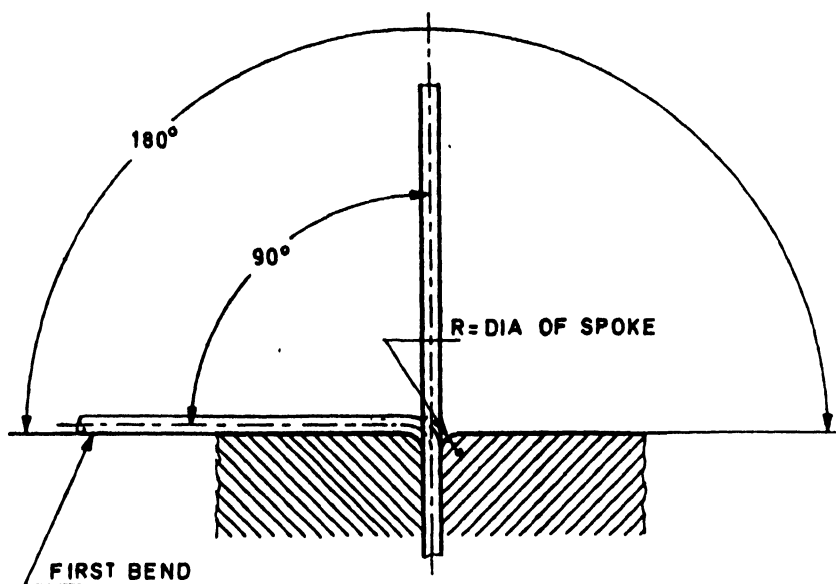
REVERSE BEND TEST FOR SPOKE WIRE
